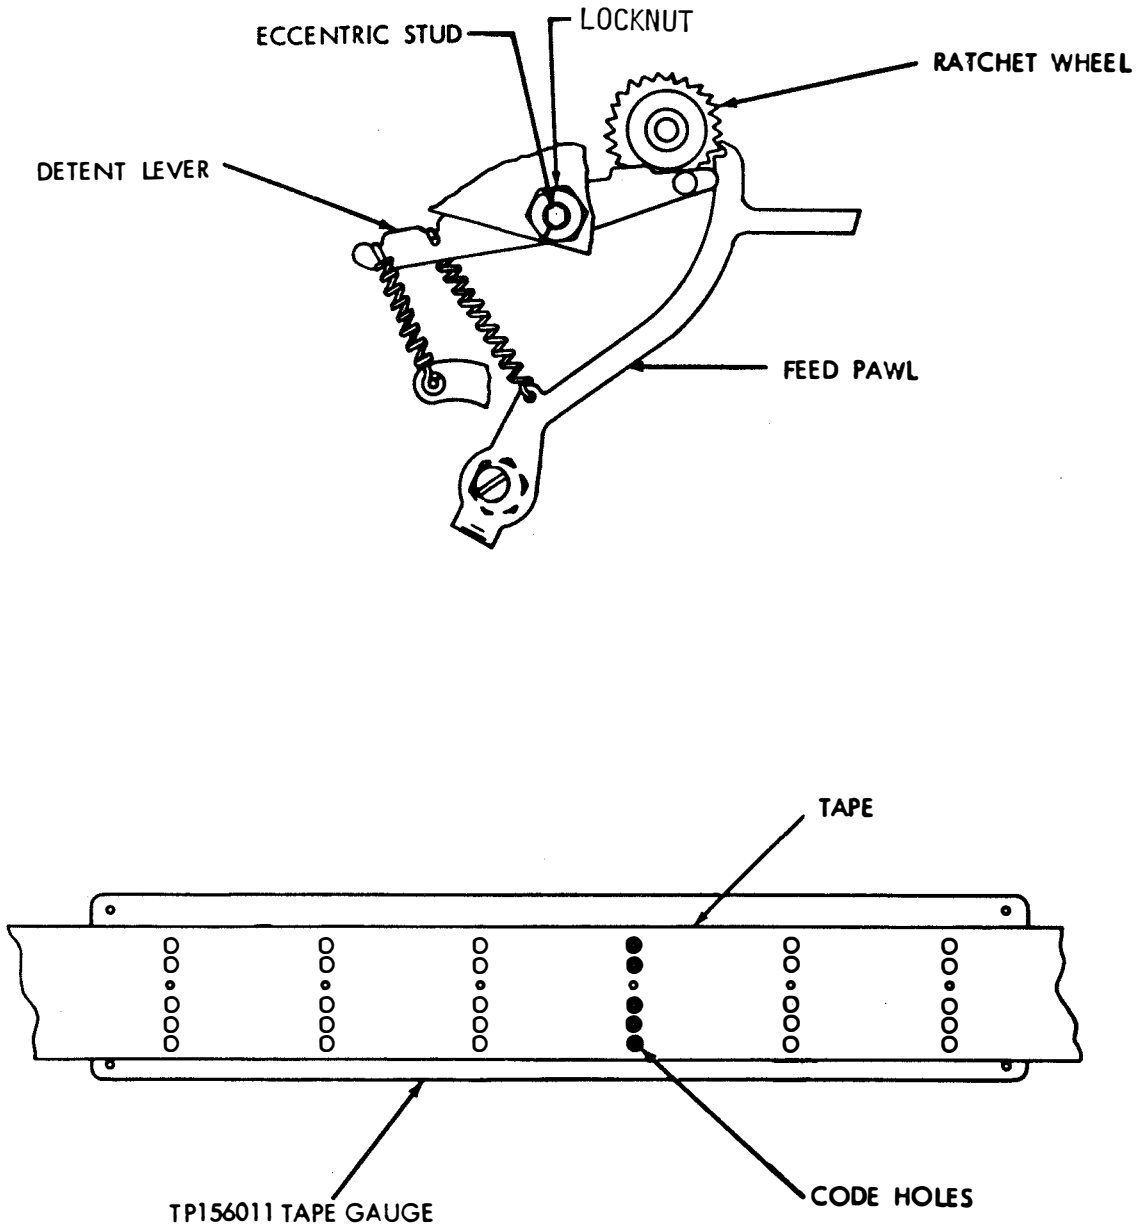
Detent Lever (For Chadless Tape), Front View
